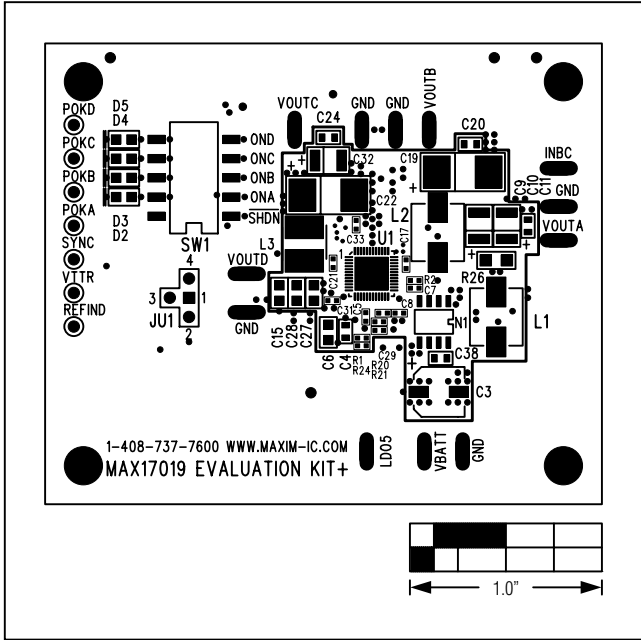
MAX17019 EV Kit Component Placement Guide—Component Side
